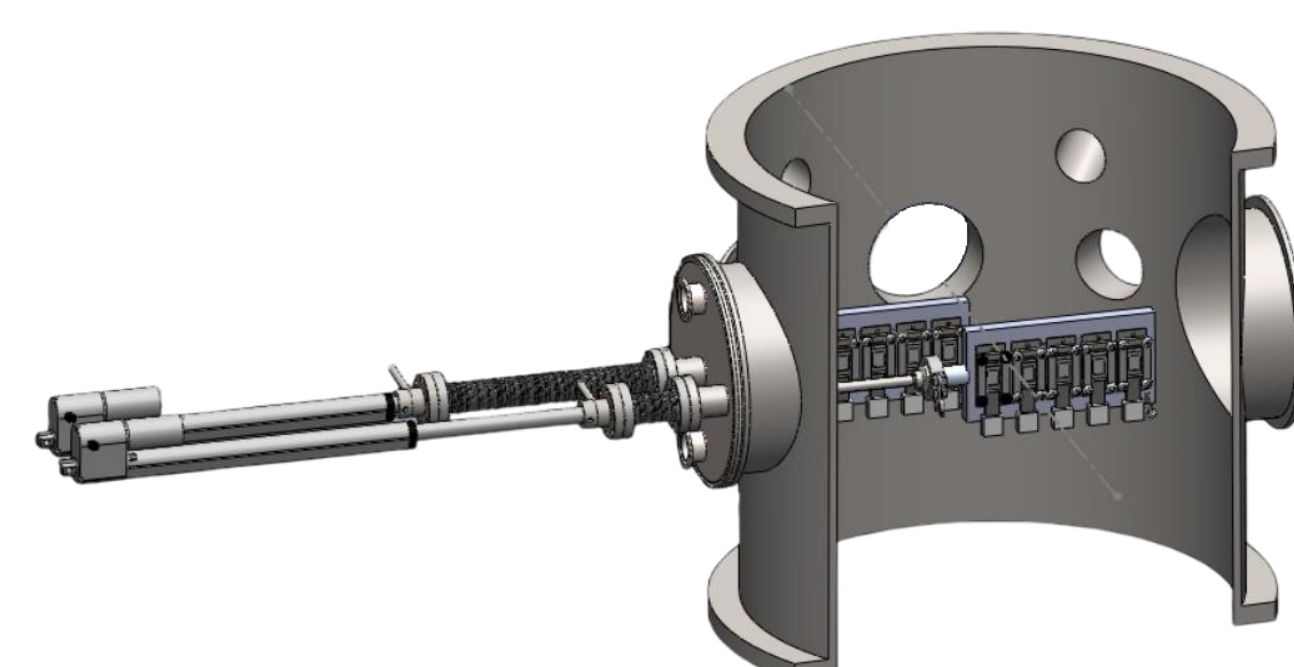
SolidWorks model of Accelerator Target Slider mounted to the target chamber.
